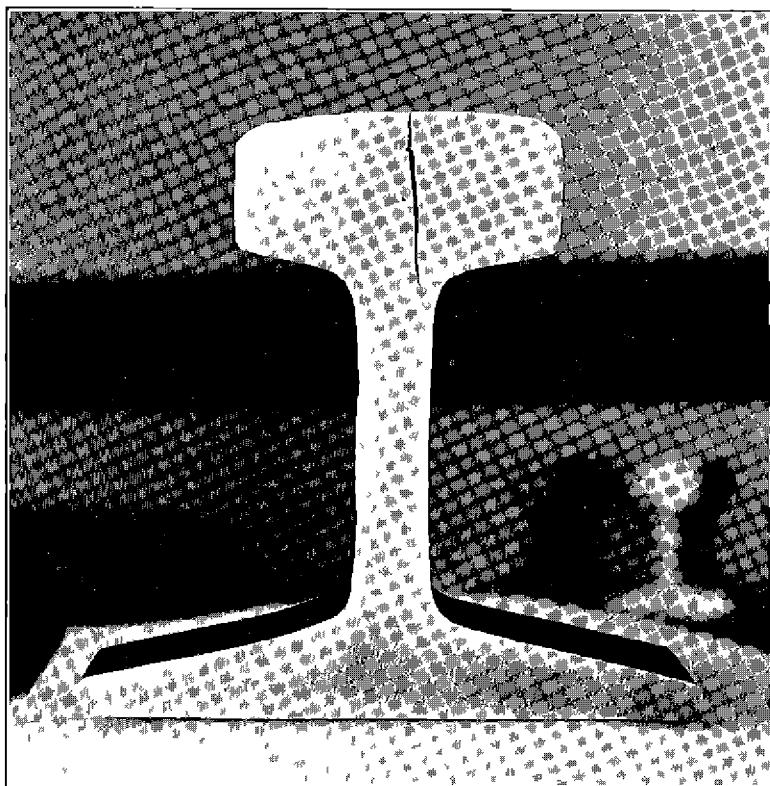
Split head fracture of Figure 34a extended by peening to running surface of head
